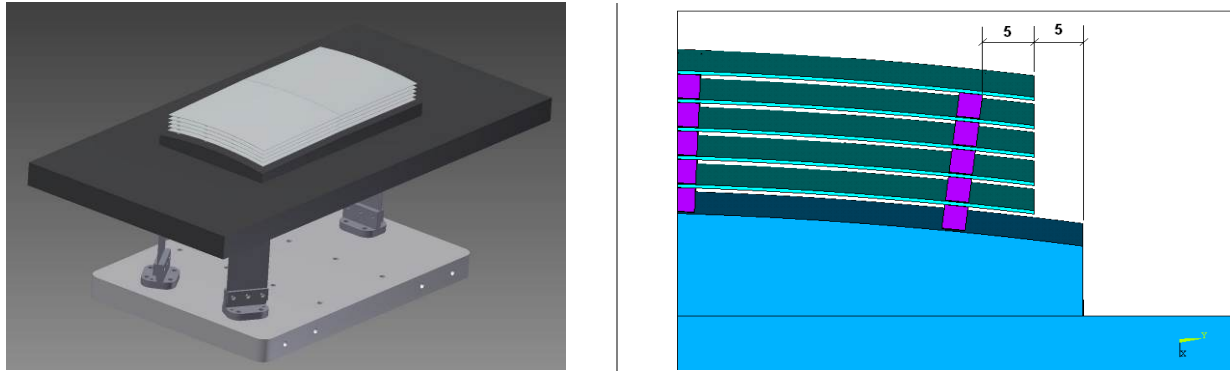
(Left) Drawing of JIM prototype: JIM consists of 5 glass segments combining parabola and hyperbola parts of the Wolter I design in one piece. The glasses are stacked gluing in between them 8 ribs per layer. The first set of ribs connects the stack to a backplane which is attached to the standard IMA interface through flexures. (Right) Details of glass layers and ribs positioning at the edge: Although the layers are of identical geometry, the radial ribs structure was chosen for conformity with flight-like radial module.
